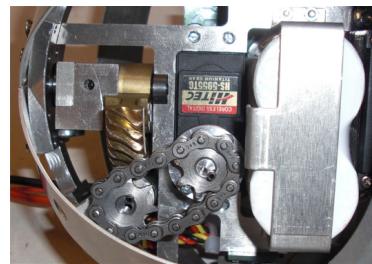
Roller chain connecting the servo motor to the worm gear.
